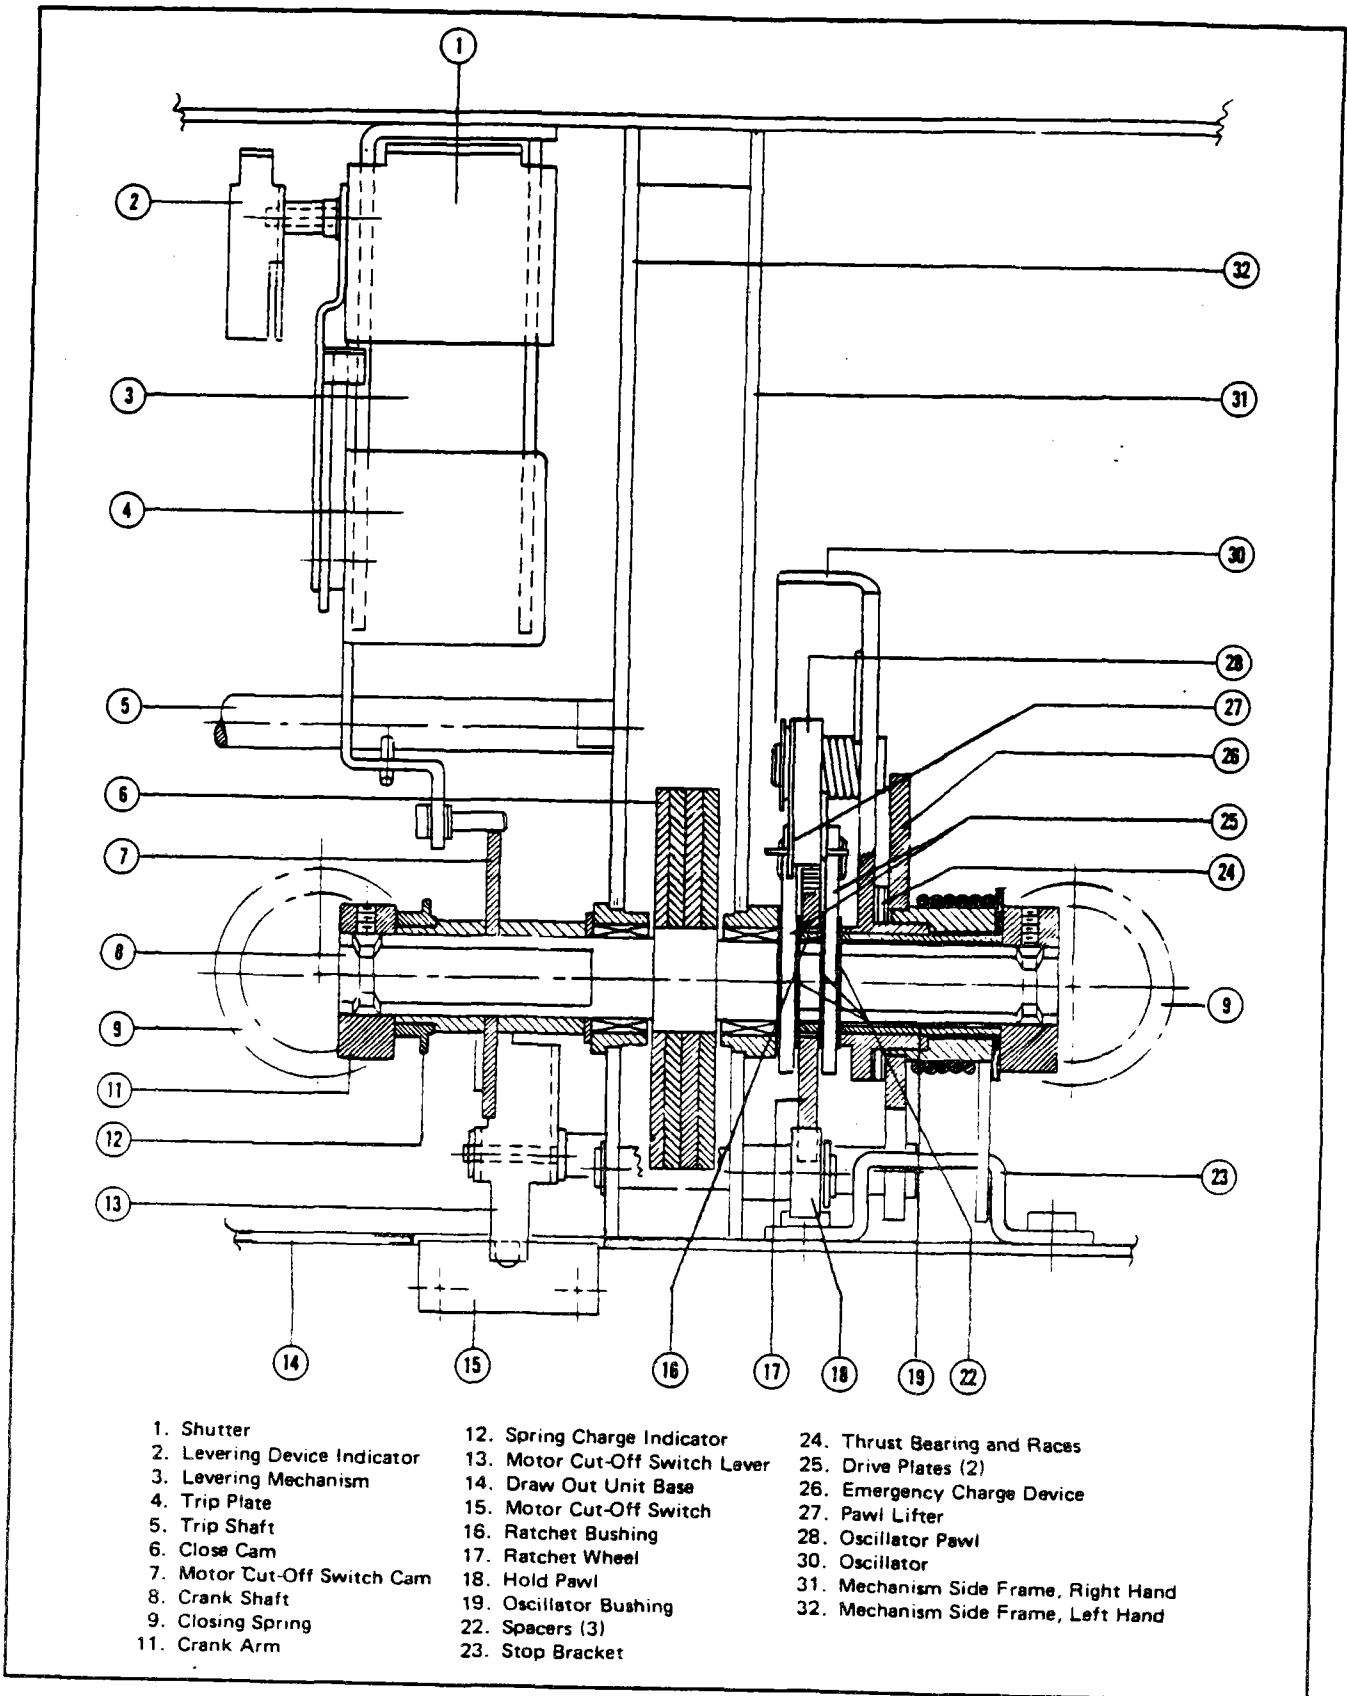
Front View Showing Major Parts of the Crank Shaft Assembly. Some Parts are Omitted for Clarity
